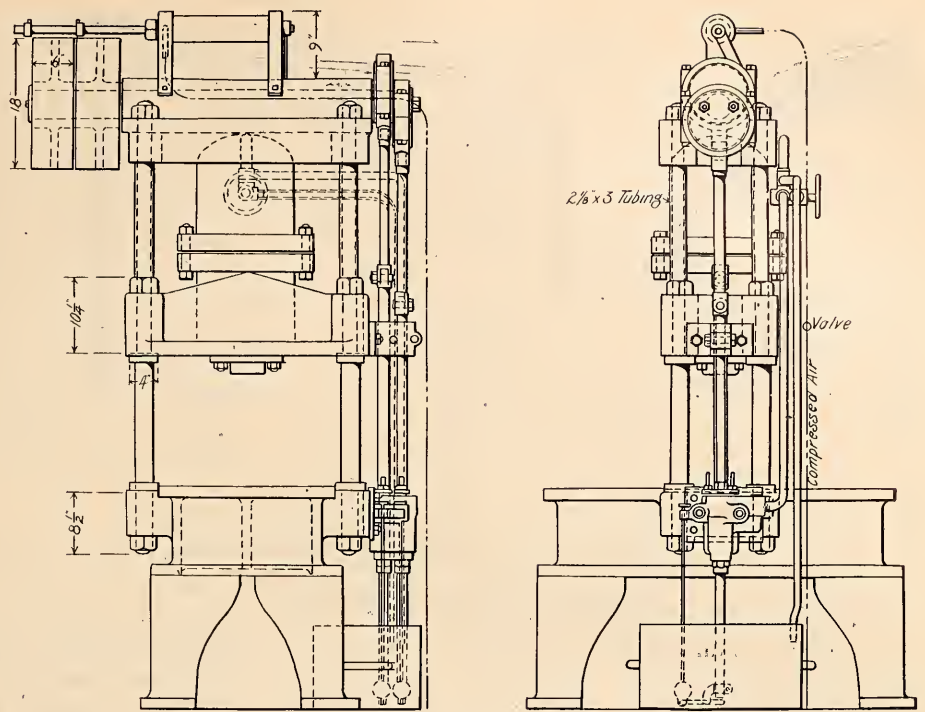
HYDRAULIC BRASS PRESS WITH PNEUMATIC BELT SHIFTER.
